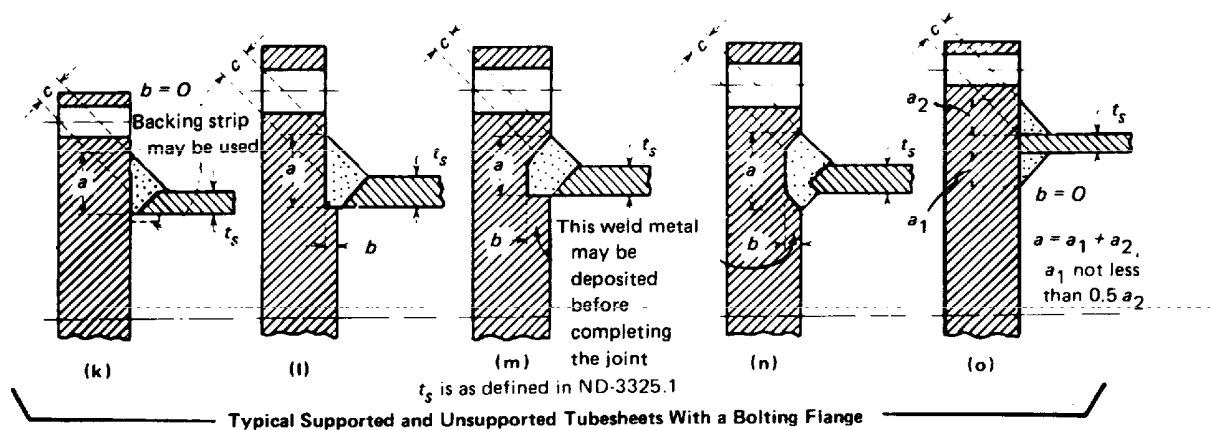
ATTACHMENT OF PRESSURE PARTS TO PLATES TO FORM A CORNER JOINT
